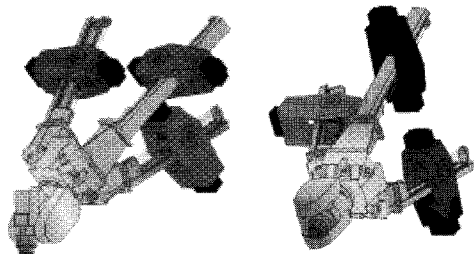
Deflection at the tool tip for two configurations of the designed machine tool
